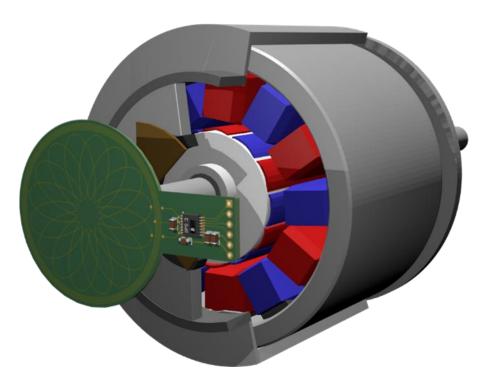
Example of an End-of-Shaft Rotary Coil Design
